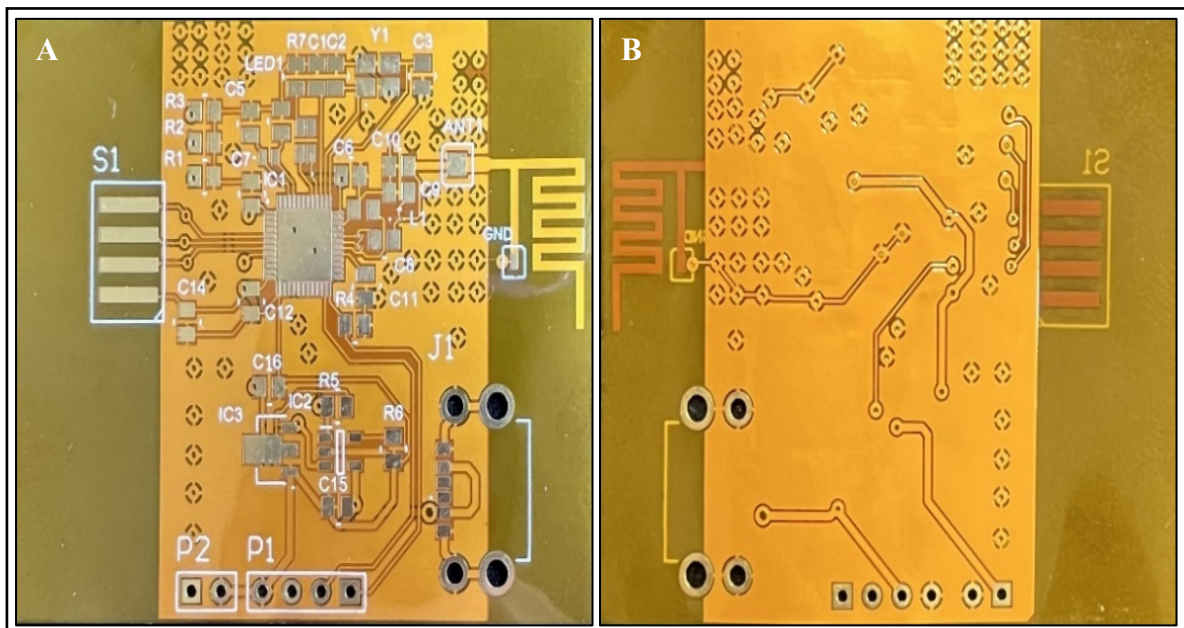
Fabricated flexible PCB, (A) front, (B) back
